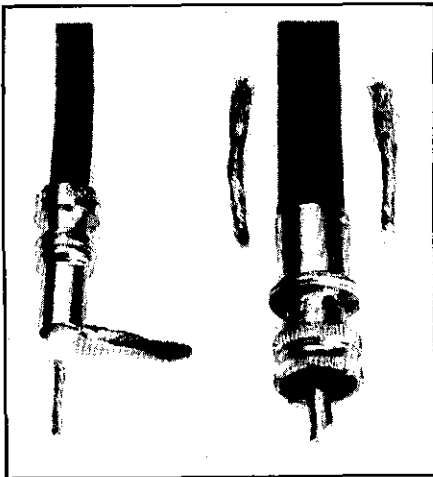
Art Zavarella's PL-259-installation hint. Left: Mini-8 foam-dielectric cable installed in a UG-176 reducer. This assembly is ready for removal of the extra braid wire (one bundle) that protrudes from the bottom edge of the reducer. At right: a PL-259 installed on RG-8 cable. The extra braid wire (two bundles) has already been cut off and the solder joints have been filed flush. For outdoor use, be sure to seal the cable jacket to the connector with epoxy or RTV sealant. See text.
